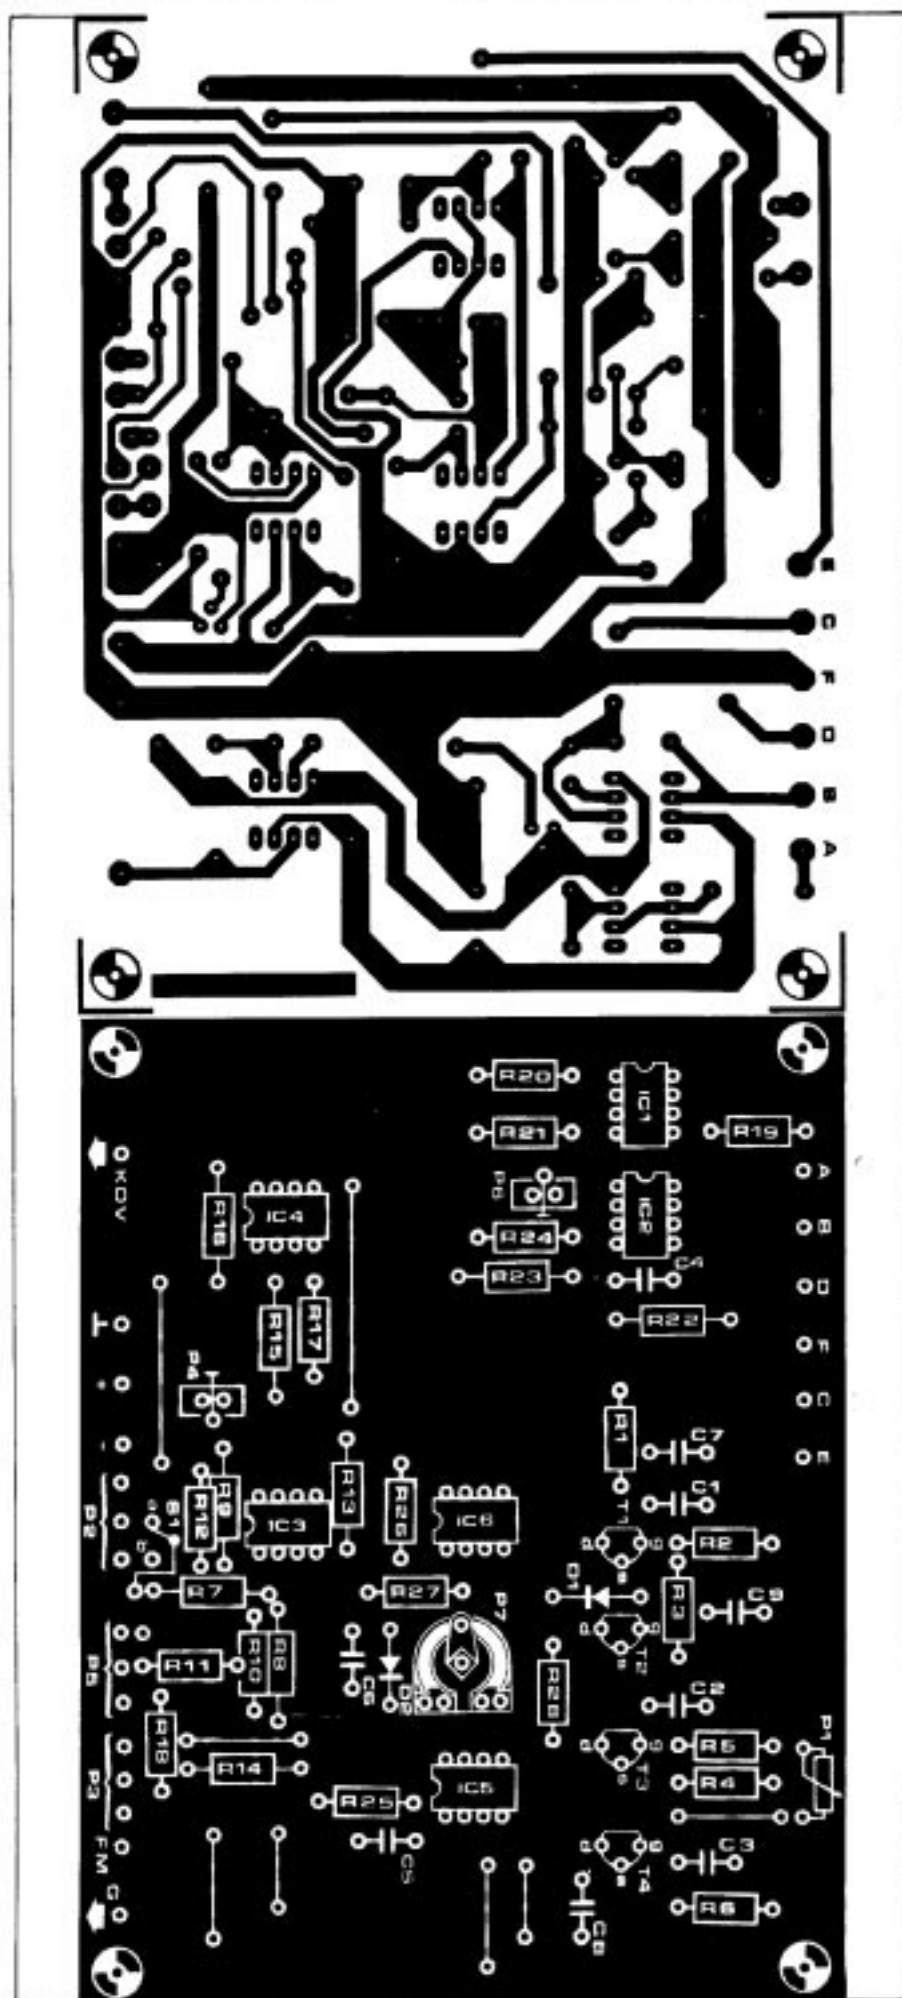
Printed circuit board and component layout for the keyboard interface circuit. (EPS 9721-1)
